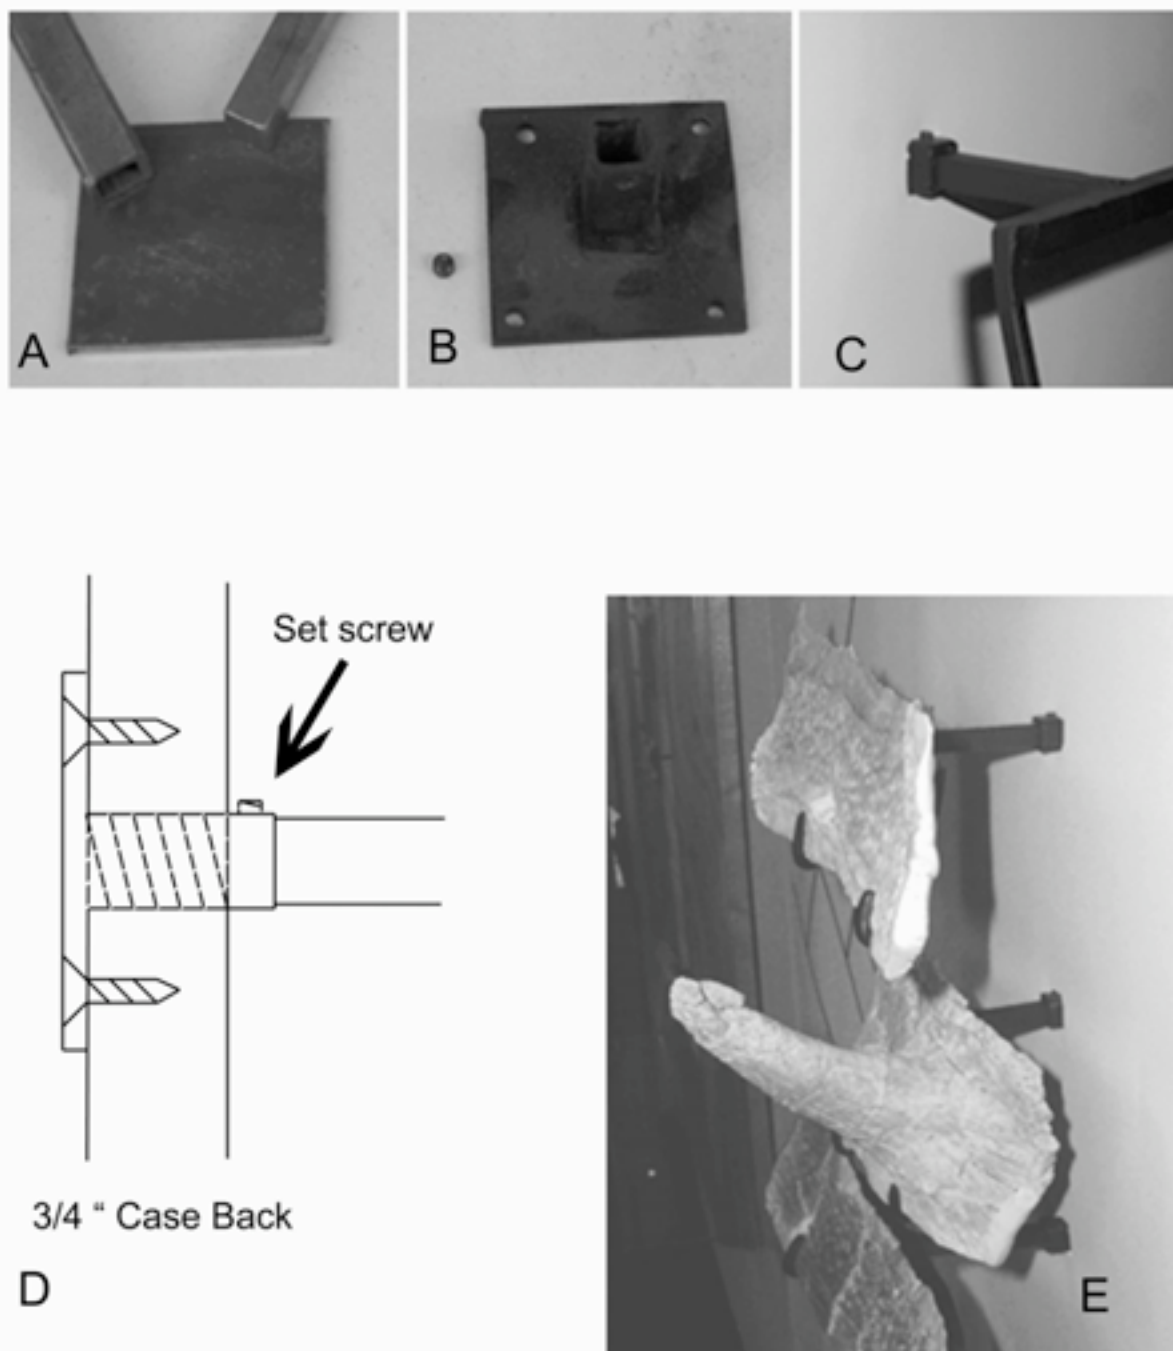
Creating mount for specimen armature system. A. Components for mount- 1 in long square tube stock, 2x2 in backing plate, armature post B. Tube stock welded to backing plate, mounting holes drilled, and set screw threaded C. Socket mount protruding from case back with armature mounted D. Cutaway illustration showing backing plate mounted to case back, set screw holding armature in place E. Detail of aetosaur plates suspended in armature.
